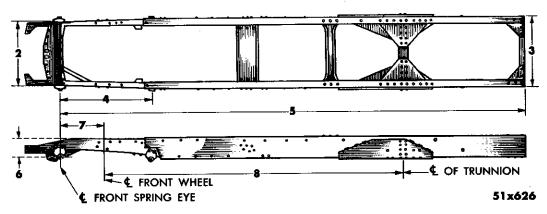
Frame Alignment (B-4-YX) (Dimensions given in inches)
